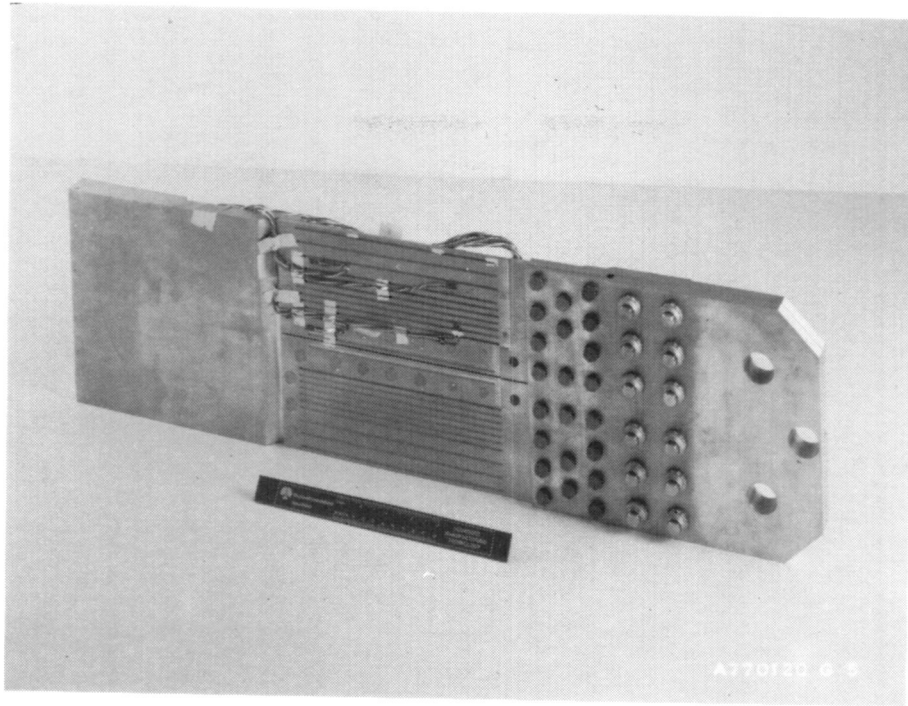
B-PCS Moldline Side of Boilerplate Specimen
